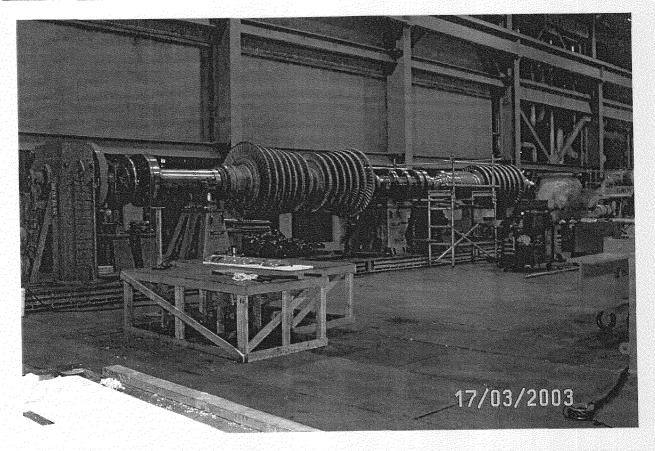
HP REAR BEARING T2 (RE-USED)
